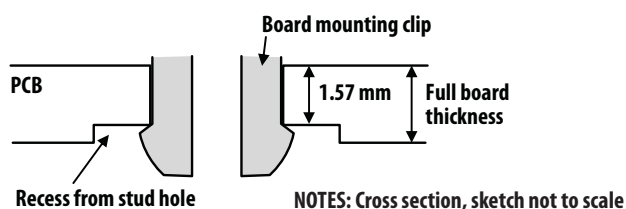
Example AFBR-5972Z PCB design with thicker PCB
